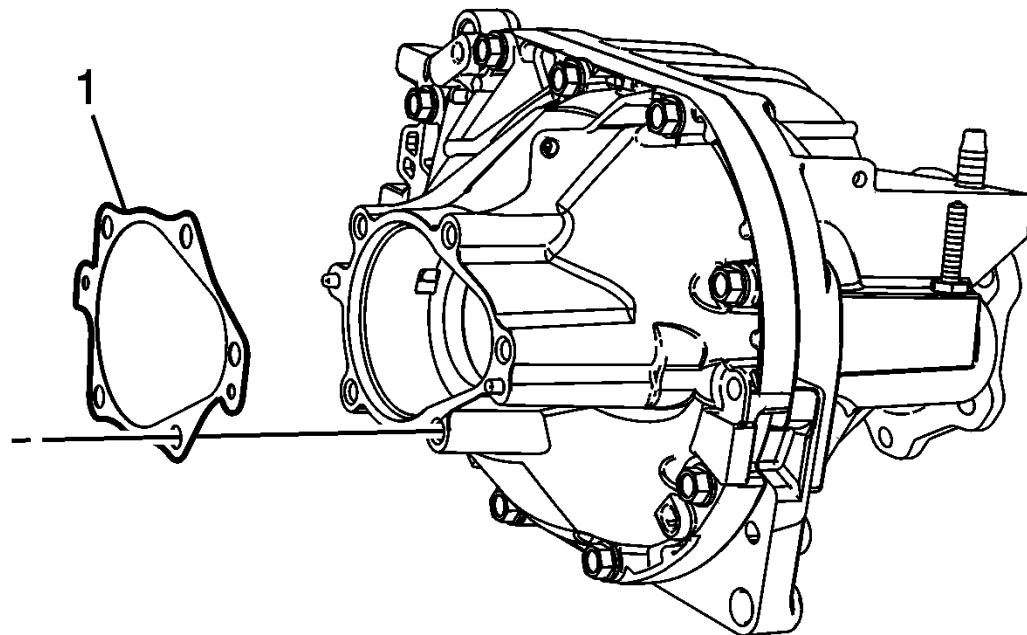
Inner Axle Housing To Differential Carrier Gasket
